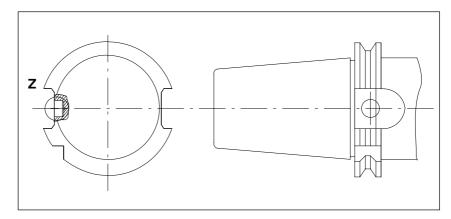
Example of mounting the MDS E623 in a quick-release taper shaft
